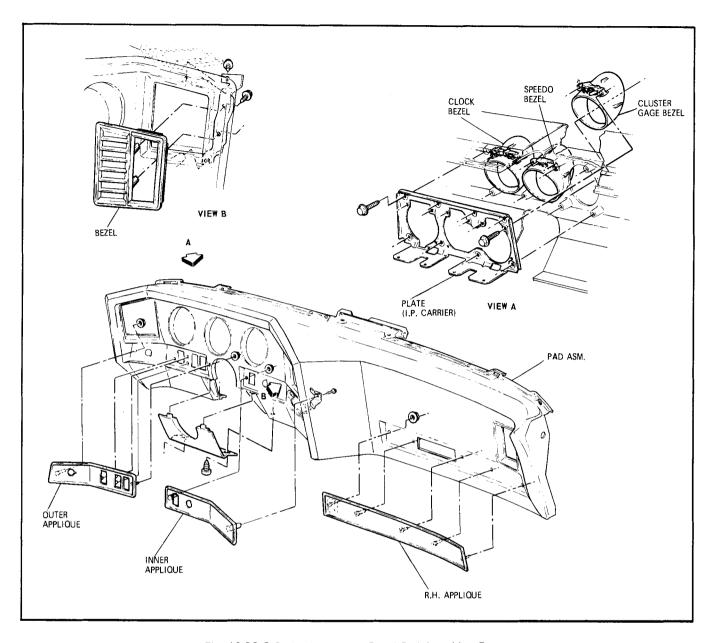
G Series Instrument Panel Pad Attaching Parts
